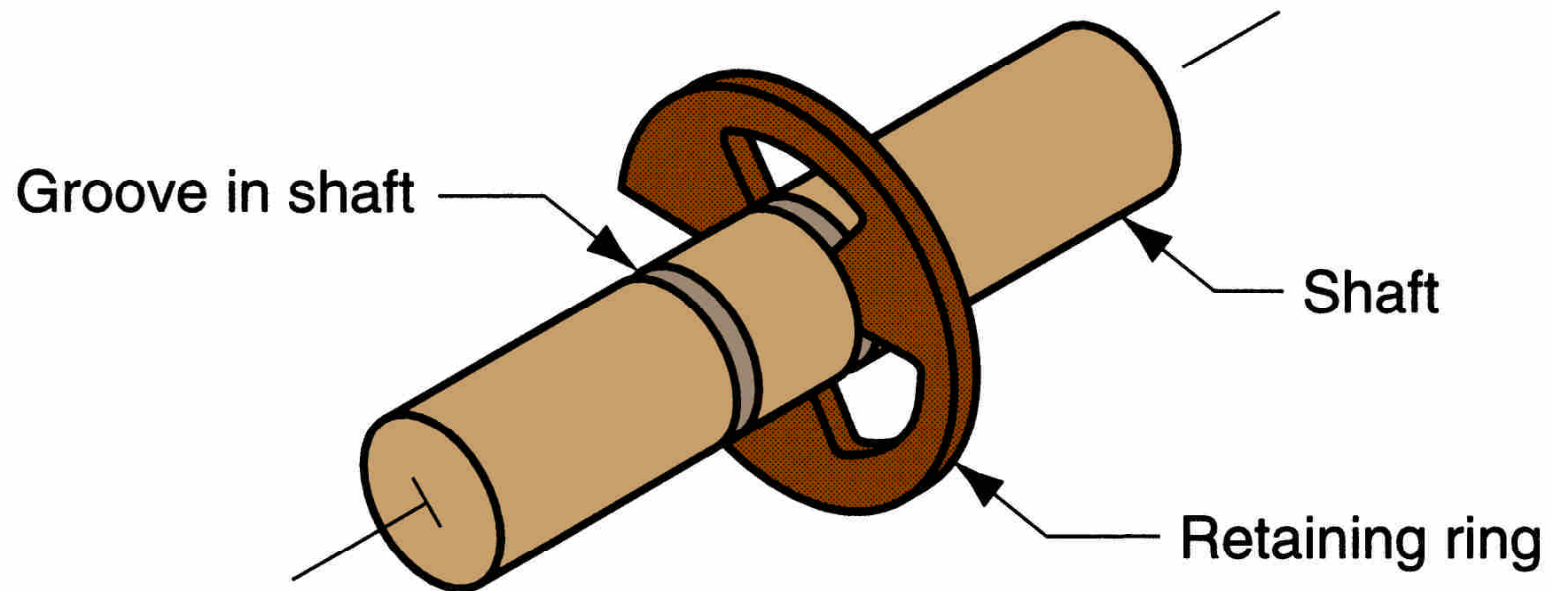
Retaining ring assembled into a groove on a shaft
